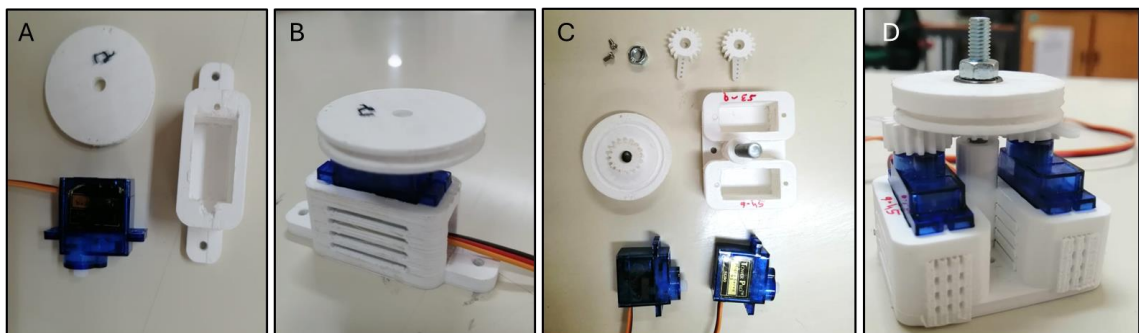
SG90 system (A) single sg90 system components (B) single sg90 system assembly (C) double sg90 system components (D) double sg90 system assembly.
